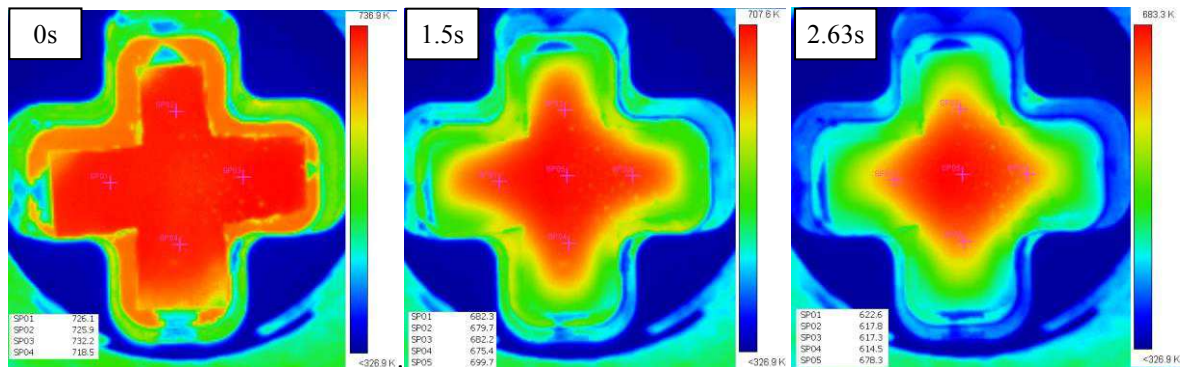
Cross die test setup developed for hot stamping with blank temperature measurements
